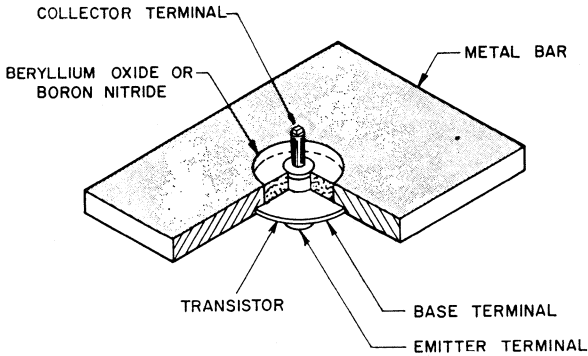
Mounting arrangement for a coaxial-package transistor in a microstripline circuit.
